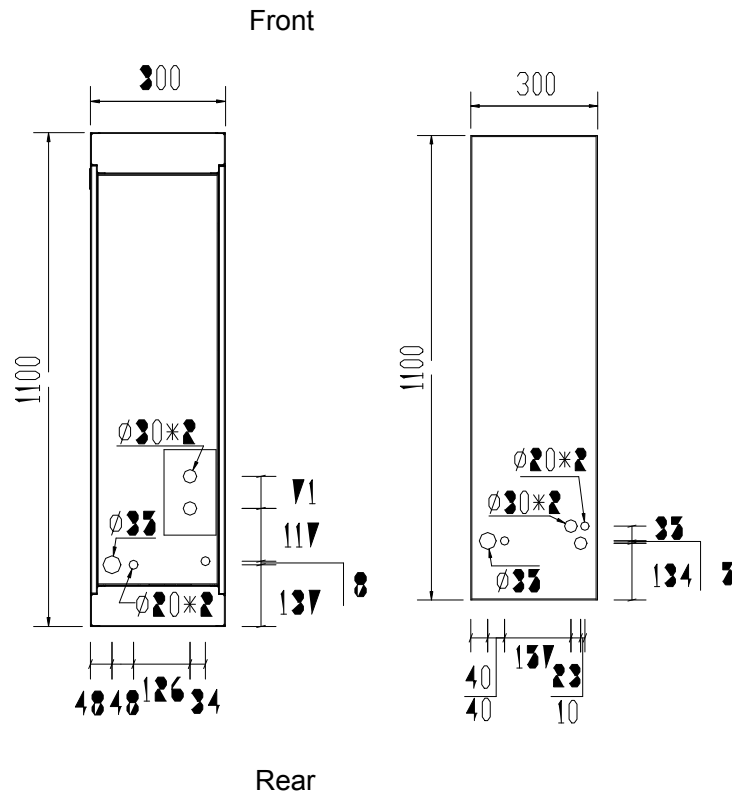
Dimensions of the Top Panel and Bottom Panel in 300mm front discharge unit (Left- Top Panel; Right- Bottom Panel)
